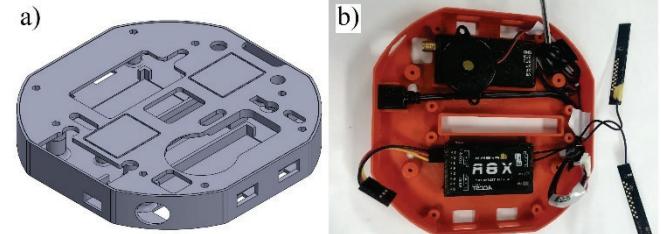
Avionics housing module: a) CAD model, b) 3D printed assembly
